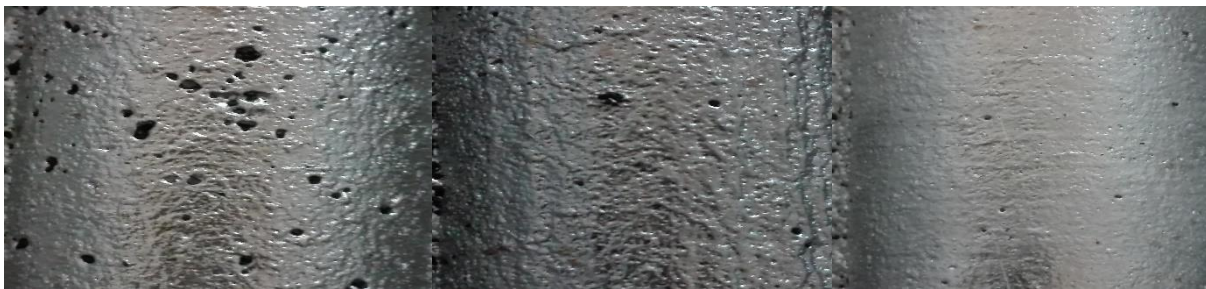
Gas porosities (blow holes) [sample specimens]
